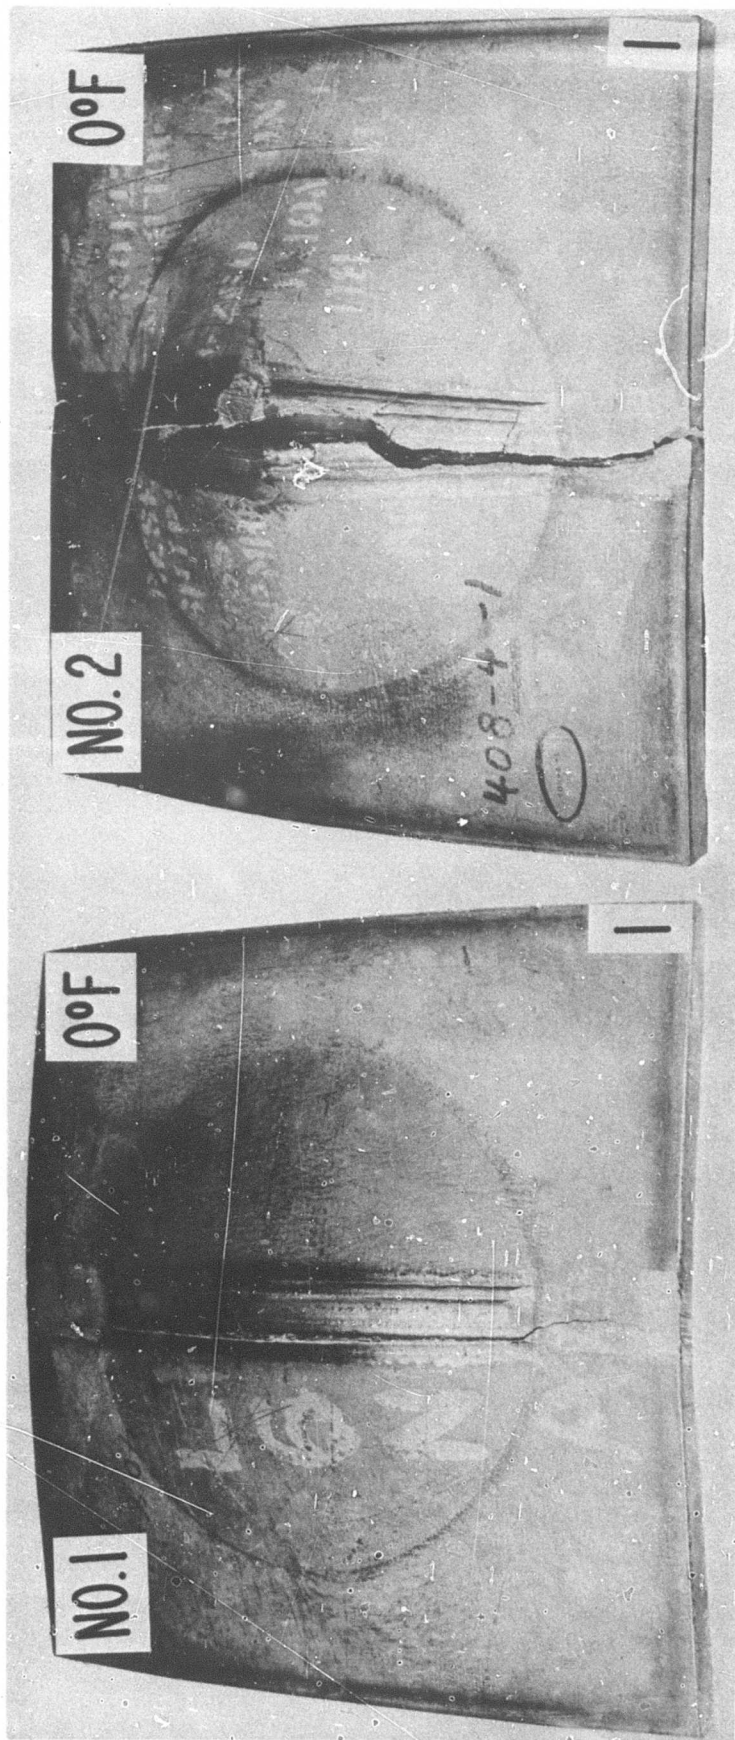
Explosion-bulge test fracture characteristics of submerged-arc weldments fabricated by E-Company. Sample No. 2 was modified with crack-starter weld.
